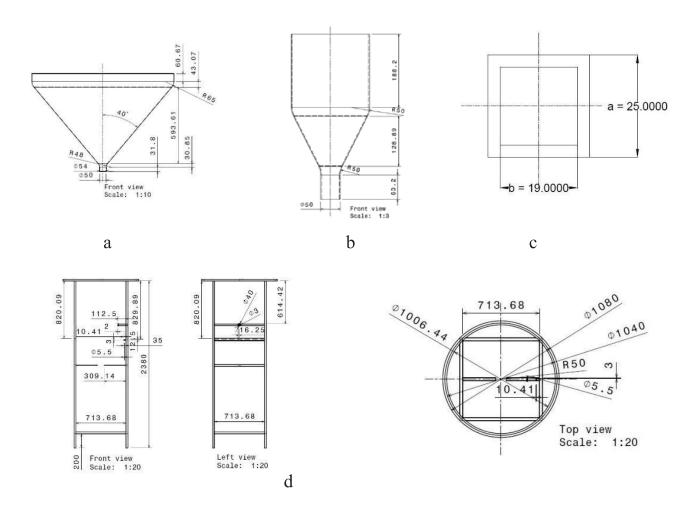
Schematic view of (a) hopper, (b) weighing system component, (c) frame (d) stand
